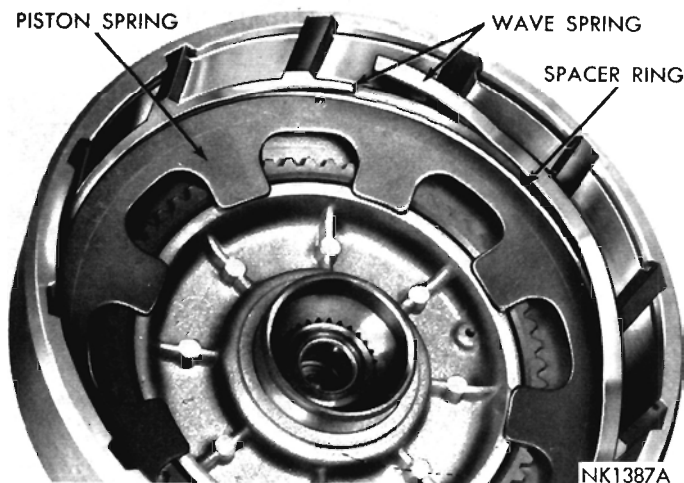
Installing Rear Clutch Spring, Spacer Ring and Wave Spring
